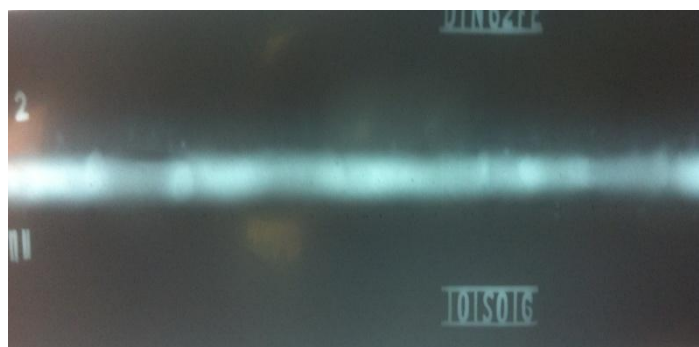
X-Ray Radiography of high heat input welded plates
